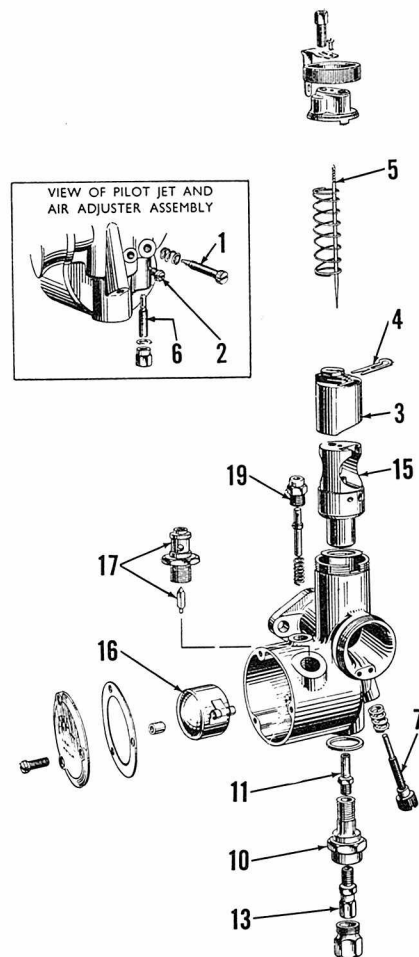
Exploded view of carburetor typical of type used on D7 model.
